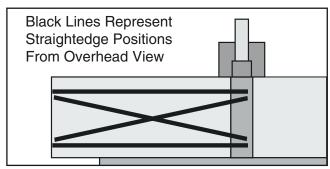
Straightedge positions for verifying if outfeed table is parallel with cutterhead.
